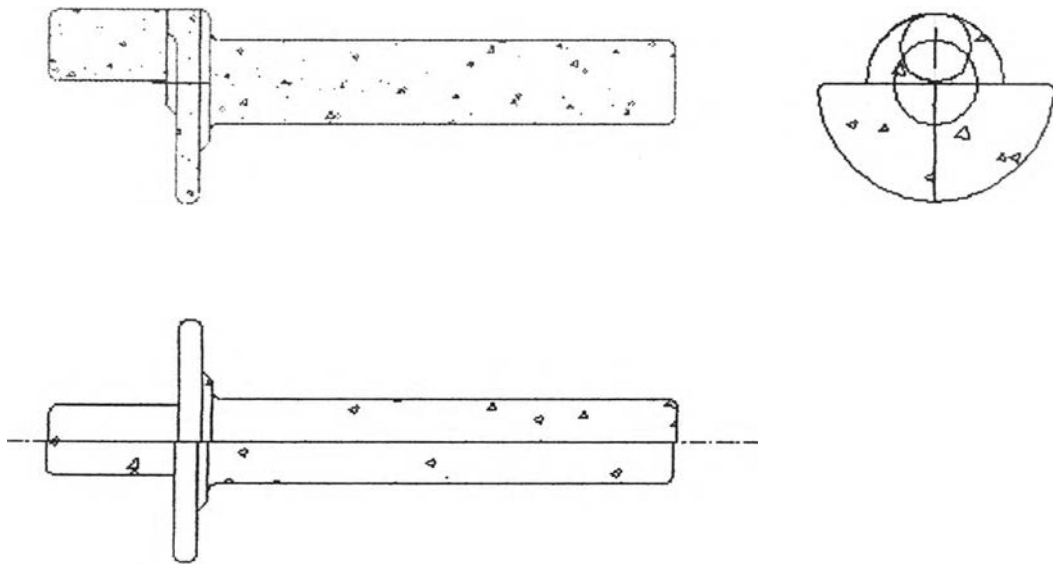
The shift of parting line problem in crankshaft's wing
